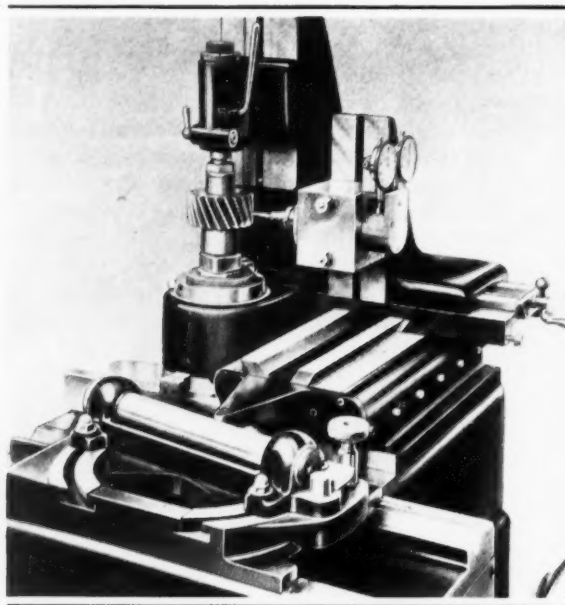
Equipment Made by the Michigan Tool Co. for Checking Involute Form and Tooth Spacing
